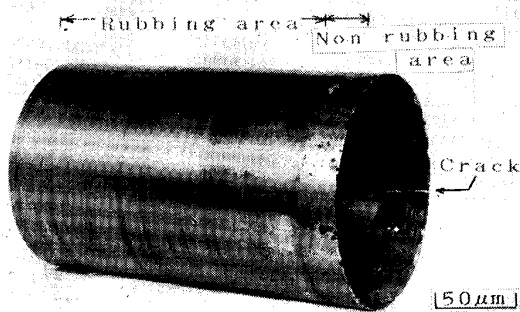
Appearance of a shaft sleeve with a SCC crack.
